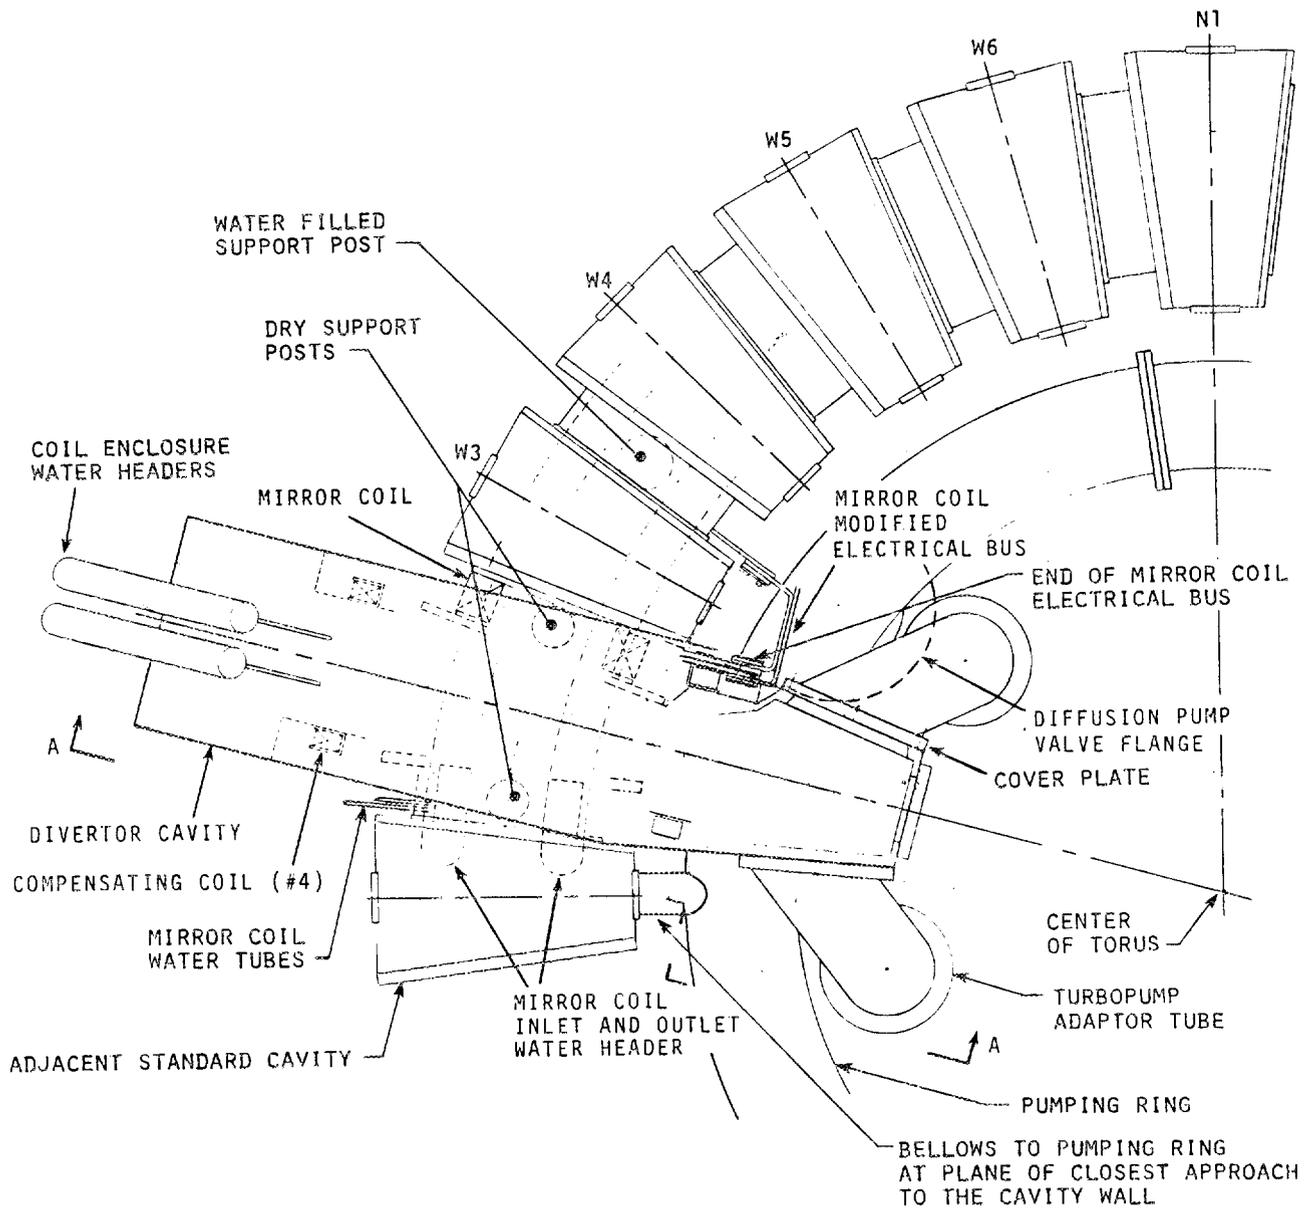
Plan View of Divertor with Pumping Panels Showing Interfaces with the Existing EBT-S
